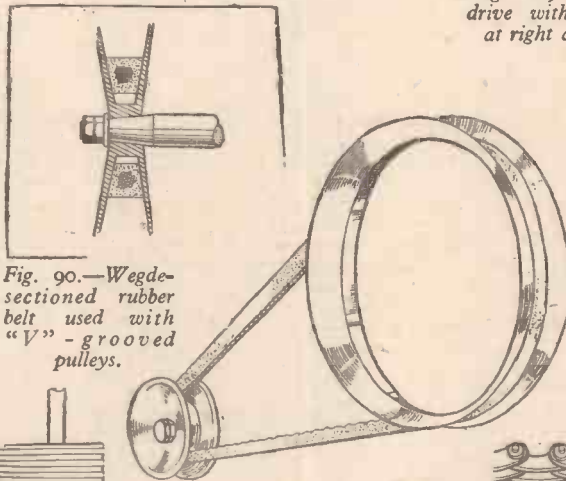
Wedge-sectioned rubber belt used with "V"-grooved pulleys.
